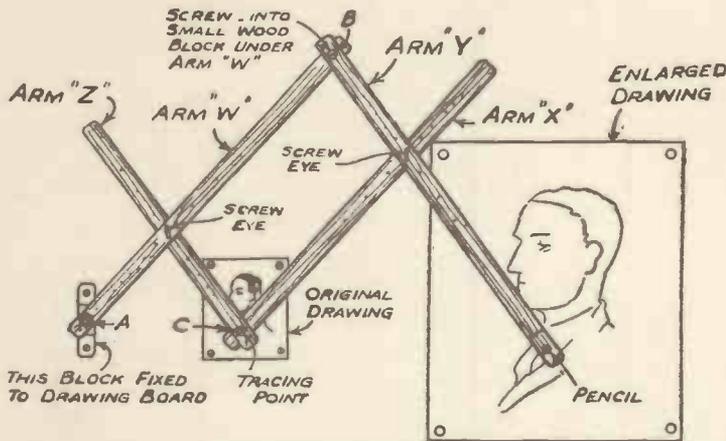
The Pantagraph completed. The assembling of the Parts is shown in this Diagram.
